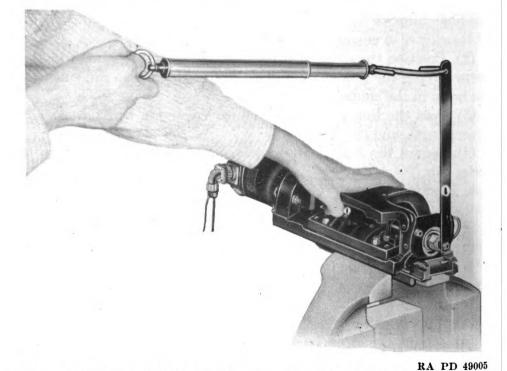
20-mm right-hand feed mechanism M3—Dynamic torque test.
